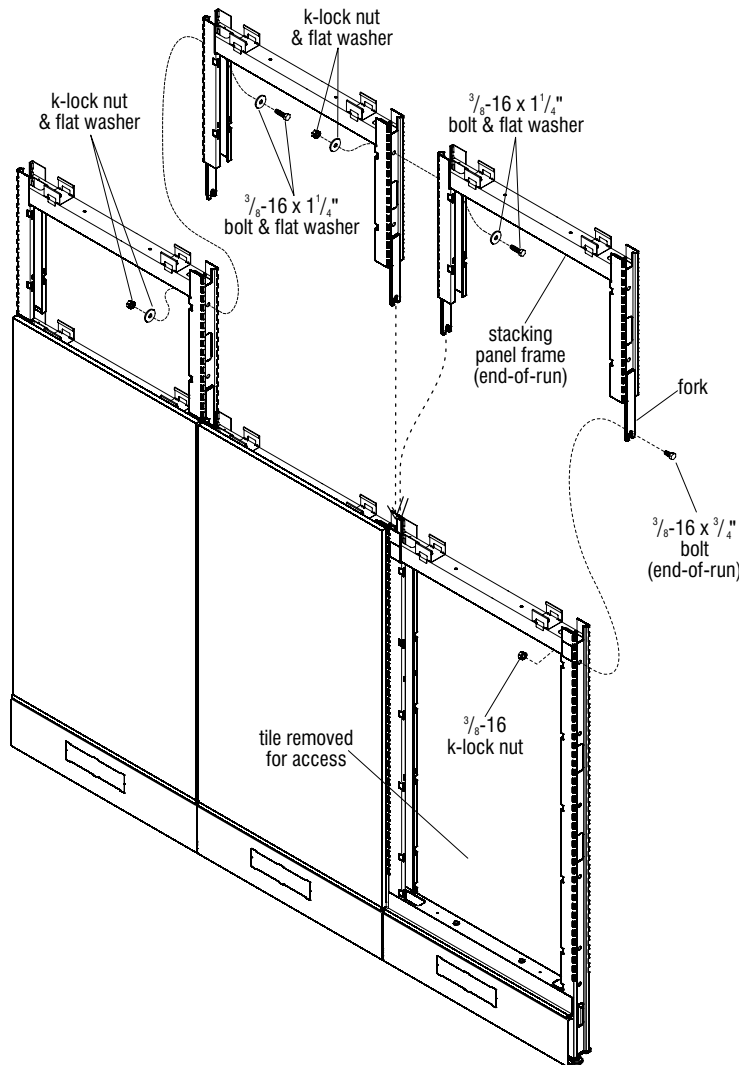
Stacking Panel (steel frame) In-Line Installation
